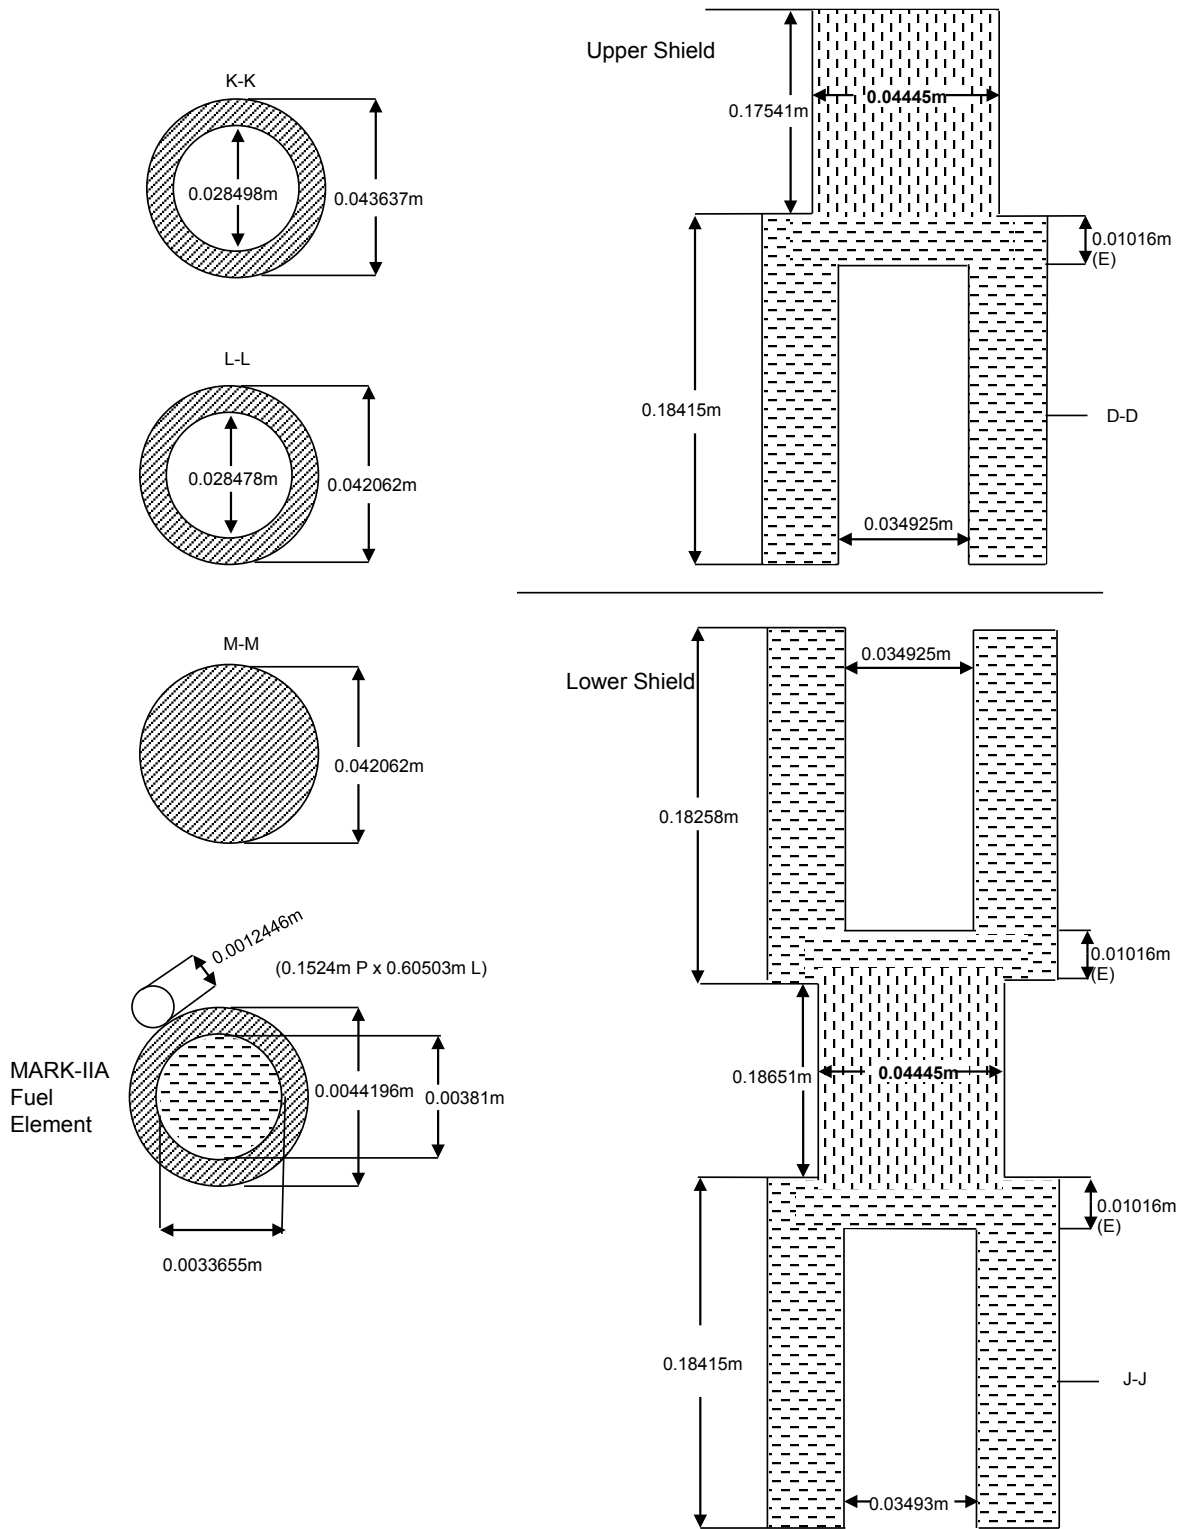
MARK-II A External Core Driver (including HFD) elevation and plane sections
